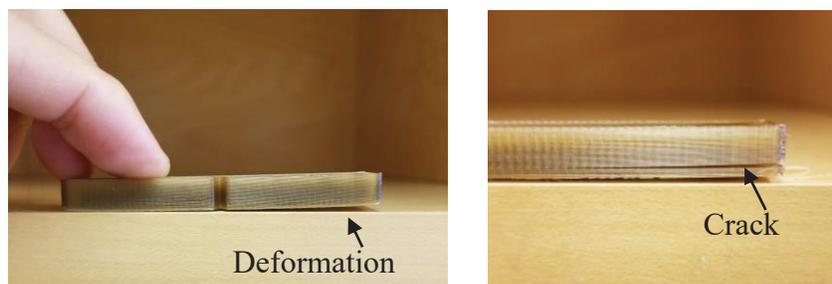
Deformation and interlayer crack of 3D printed PEEK Parts
